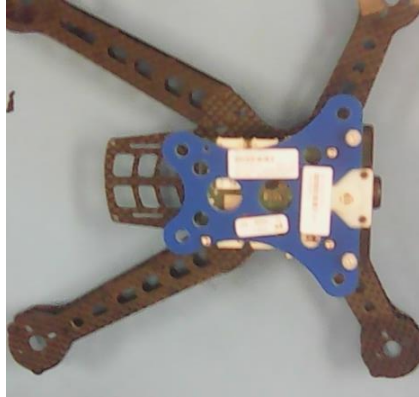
Attach the flight board to the bottom plate. Ensure the standoff threads pass through the newly drilled holes.
